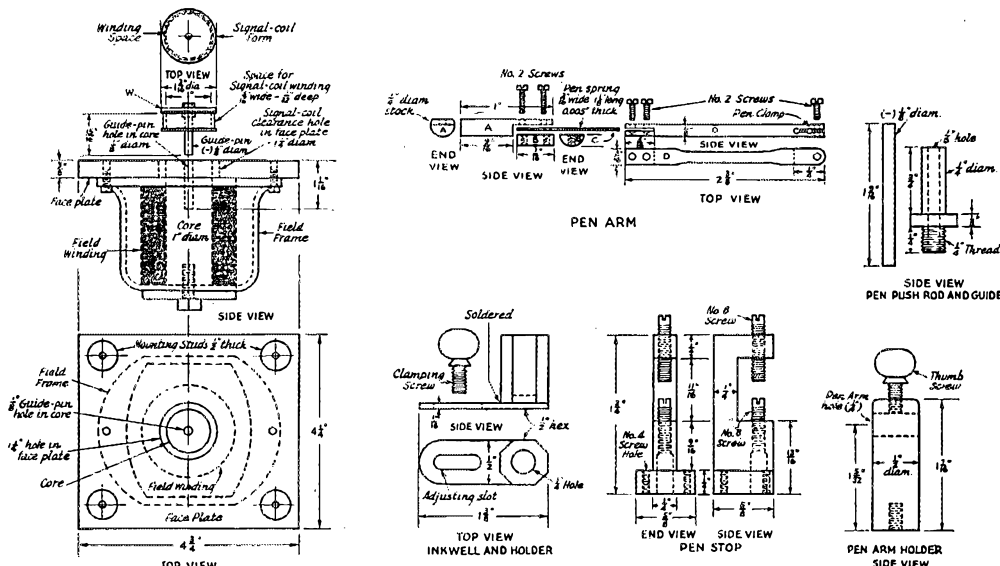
Pen and actuating mechanism. Details of assembly are given in the text.
